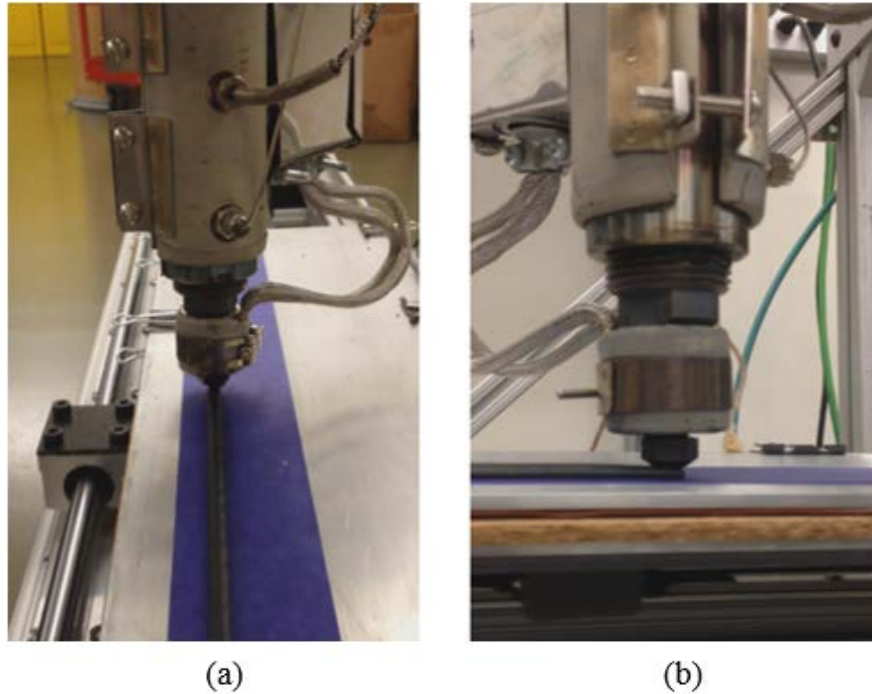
Fabrication process; (a) back view and (b) side view
